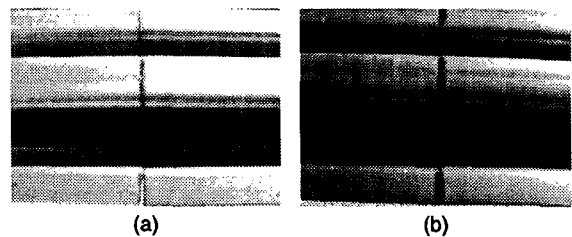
Photograph of laser weld seam after roll forming.
